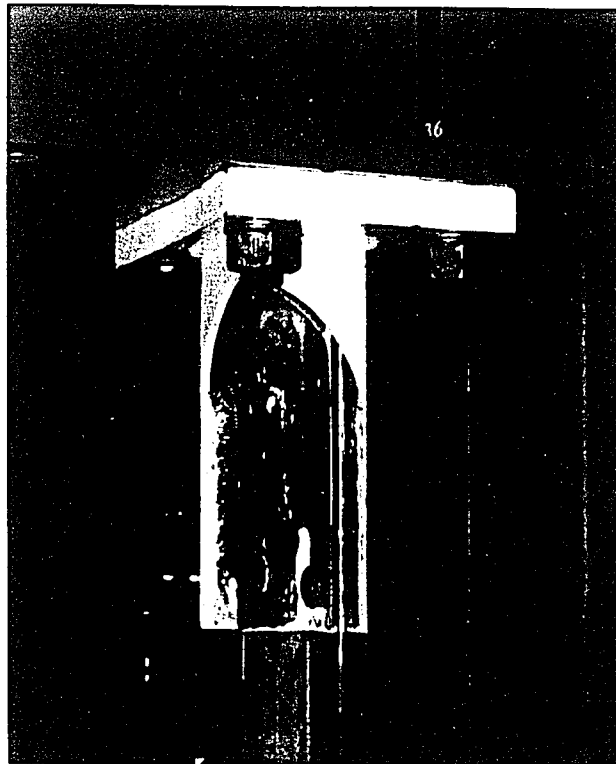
Clamp fixture used for Axial and Biaxial test setup
